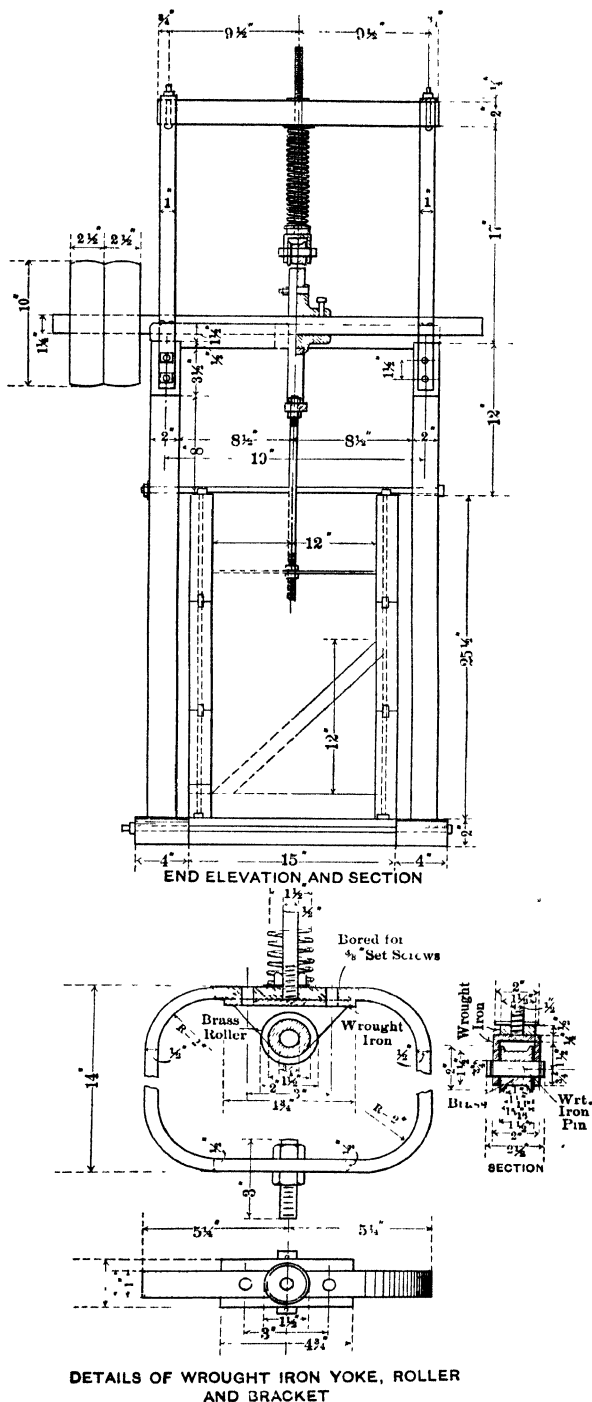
THE JARVIS LABORATORY-JIG, END ELEVATION AND SECTION, AND DETAILS OF YOKE, ETC.
